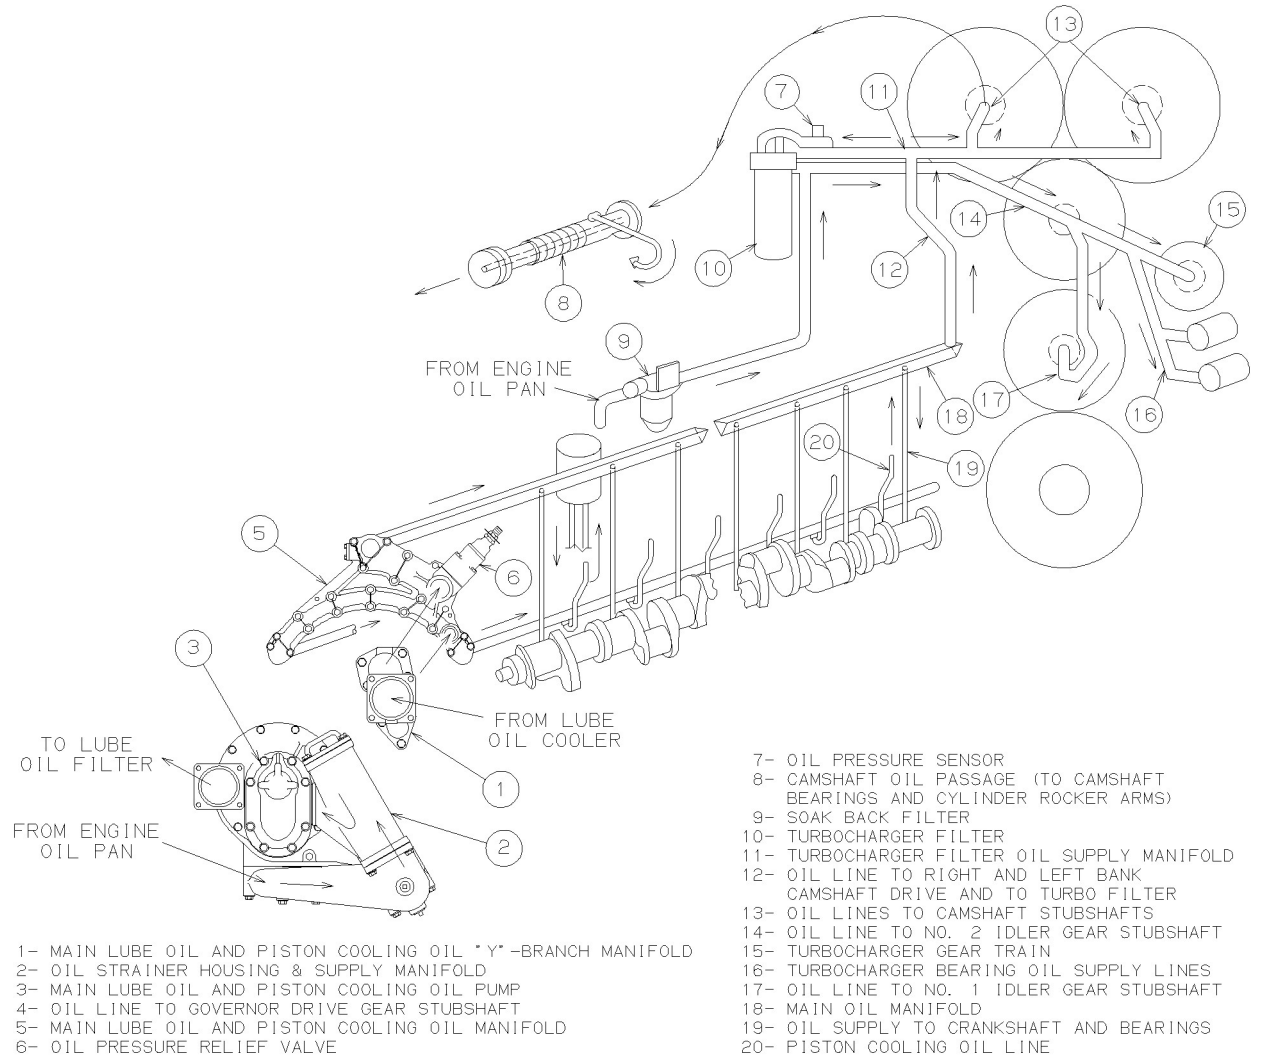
Typical Lubricating Oil System (20-Cylinder EMDEC Controlled Engine Shown)
